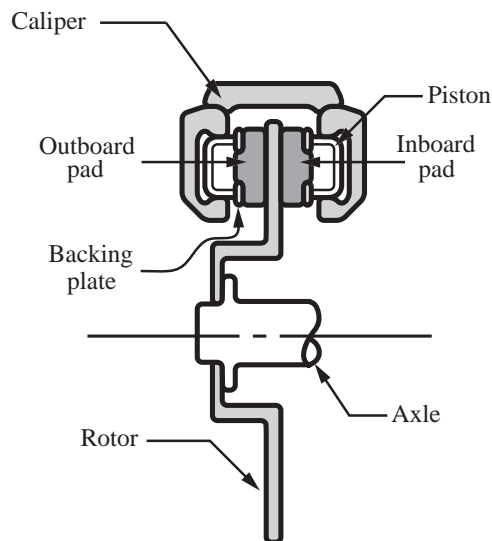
Cross-section of a simplified disc brake. The wheel (not shown) is also attached to the rotor, typically at the axle flange. The disc brake shown in this Figure has a fixed caliper.
